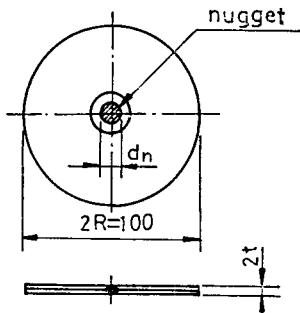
Shapes and dimensions of specimen by spot welding
